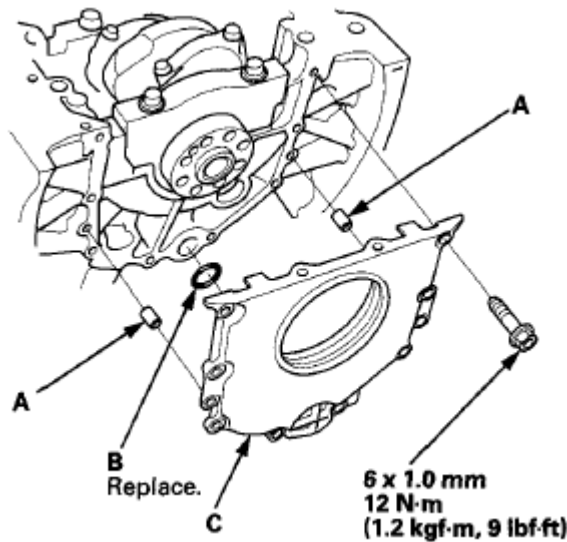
Installing Dowel Pins, New O-Ring And Engine Block End Cover On Engine Block With Torque Specifications
